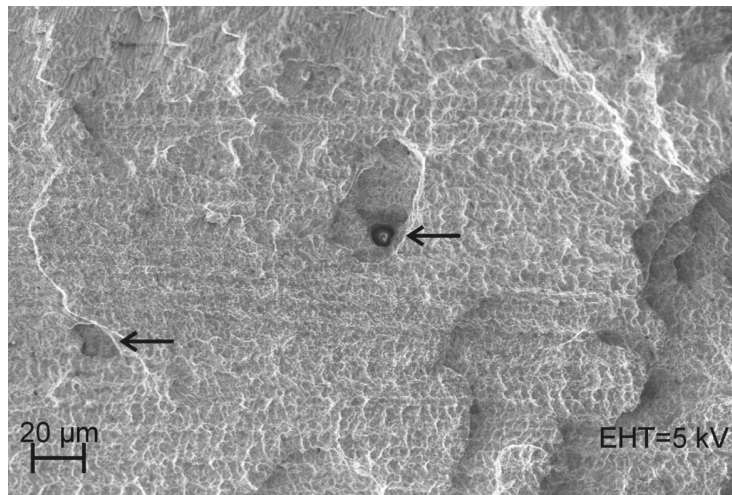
Fracture surface from a transversal tensile test bar, showing an unmelted particle and pre-fracture (arrows)
